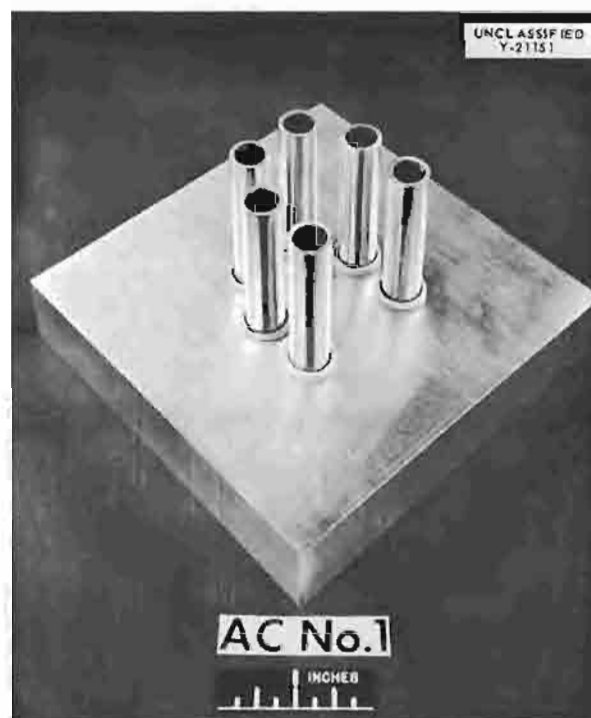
Tube-to-Header Sample Braze Assembly Showing Preplacement of Coast Metal Brazing Alloy No. 52 Rings.
